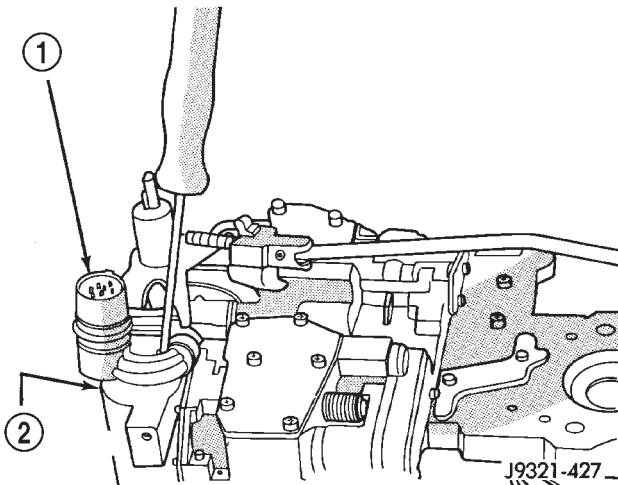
Solenoid Harness Case Connector Shoulder Bolt
